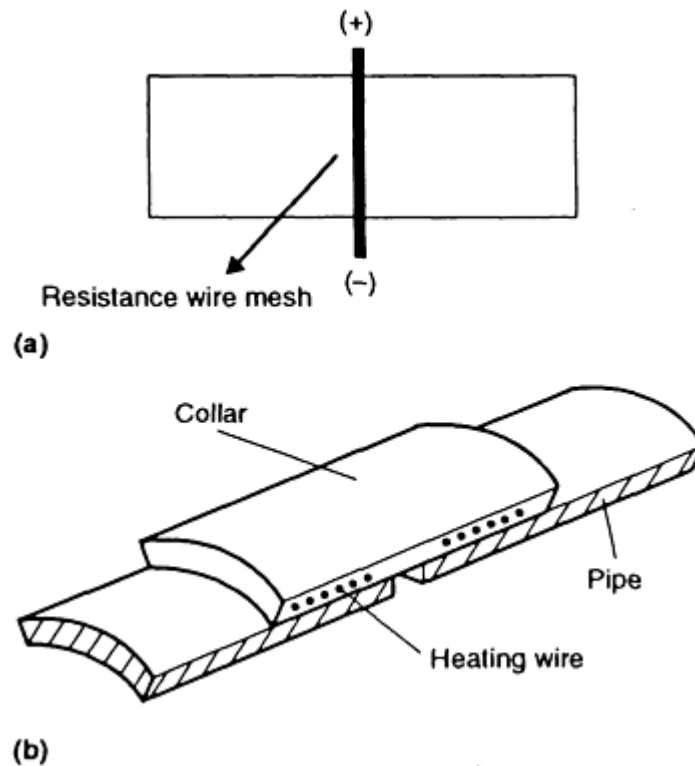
(A) ELECTROFUSION (RESISTANCE) WELDING PROCESS. (B) ELECTROFUSION WELDING PROCESS. SOURCE: REF 42
